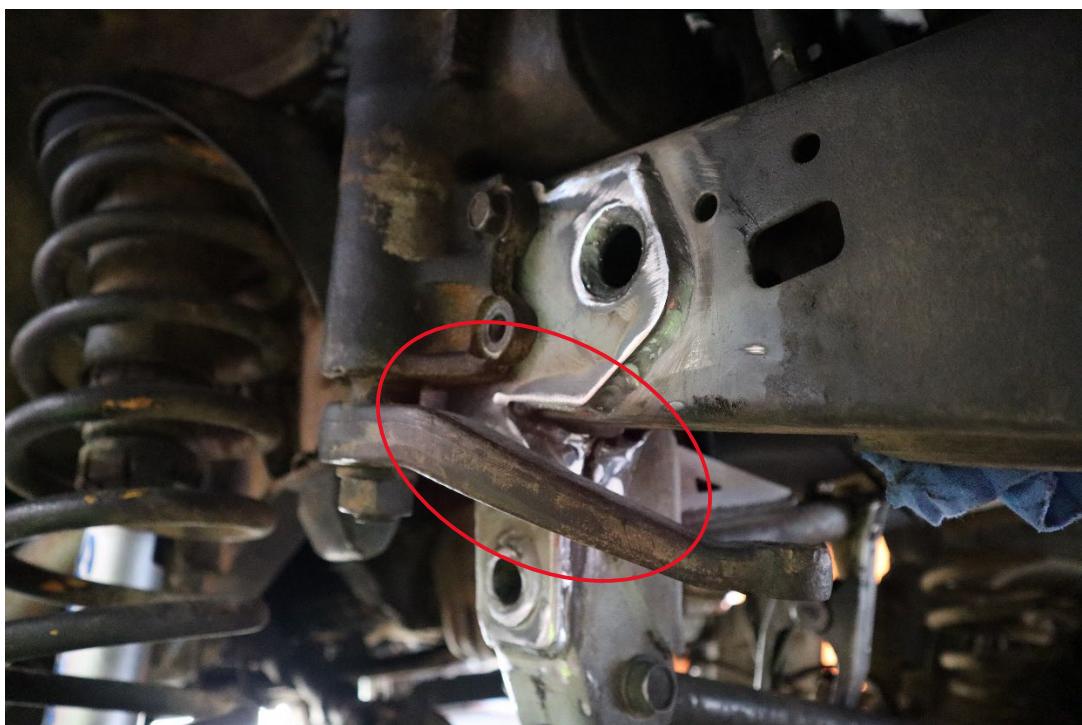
Location for small outer gusset. Small square tag to point up to fill in gap.
